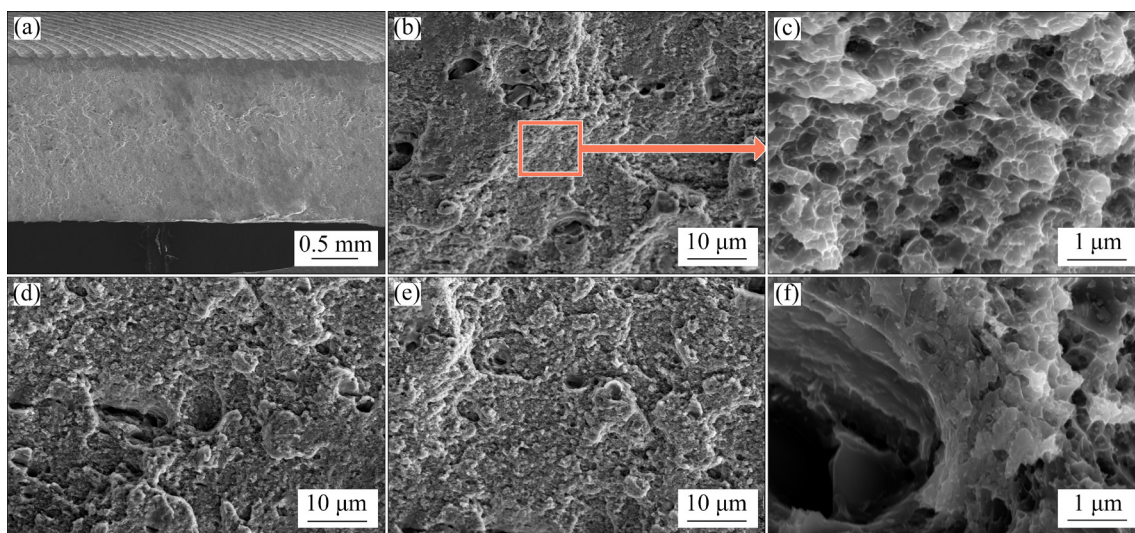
Fracture surface morphologies of FSW joint obtained at welding speed of 120 mm/min: (a) Low magnification morphology of fracture surface; (b–f) High magnification morphologies of fracture surface in middle of weld
